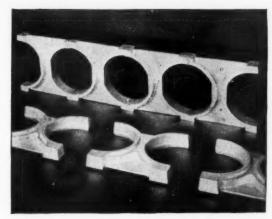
Typical use of drop-forging and flash-welding to provide components of irregular shape and difficult proportions.
